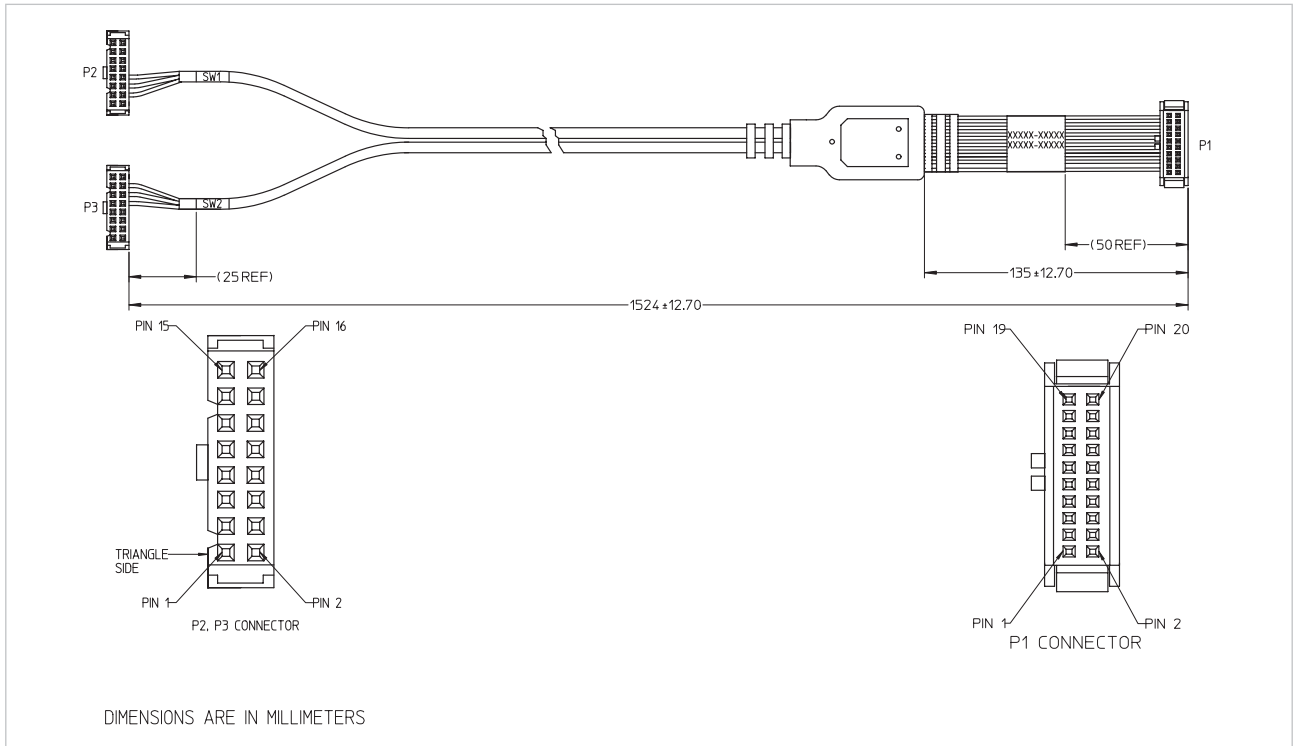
Option 601 - 20 pin to 2x16 pin interface cable assembly
